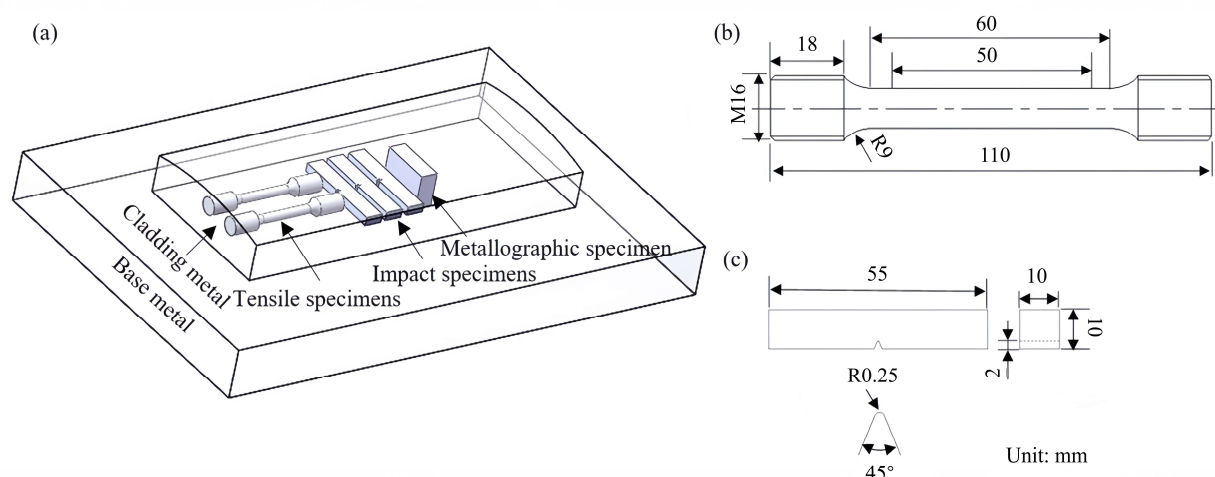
(a) Schematic of sampling position. (b) Tensile specimen dimensions. (c) Impact specimen dimensions.
